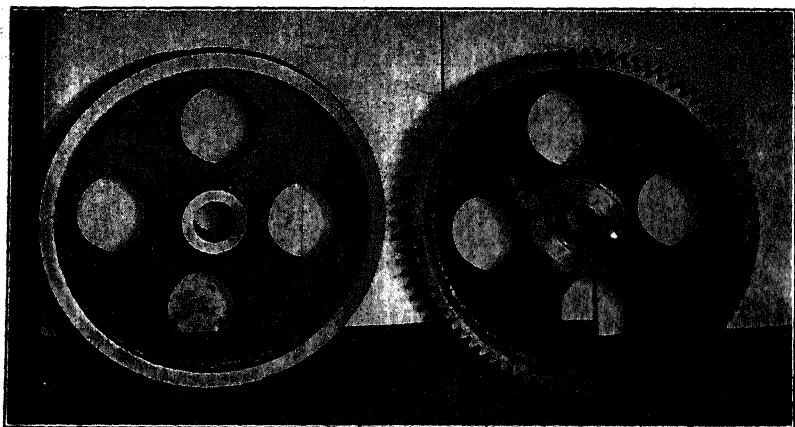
Arc-welded gear blank and finished gear of 28-in. O.D.
